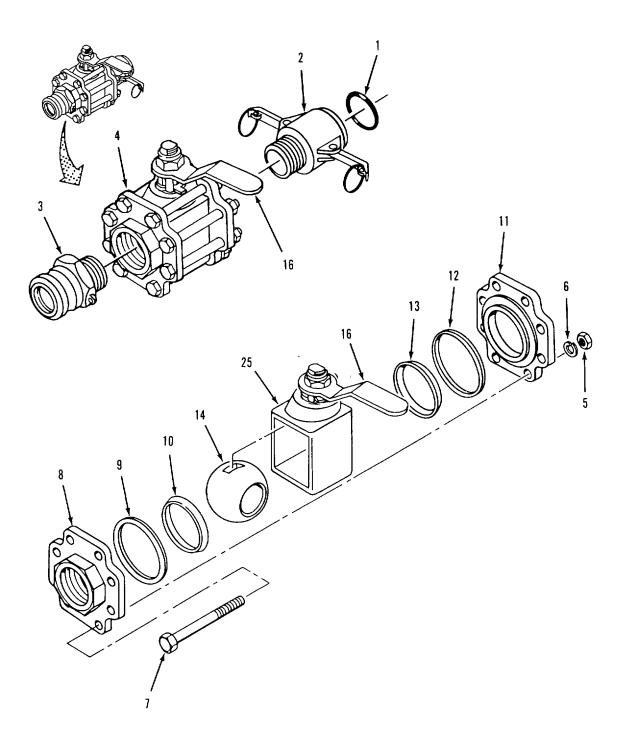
Quick Acting Valve Repair (Sheet 1 of 2)
